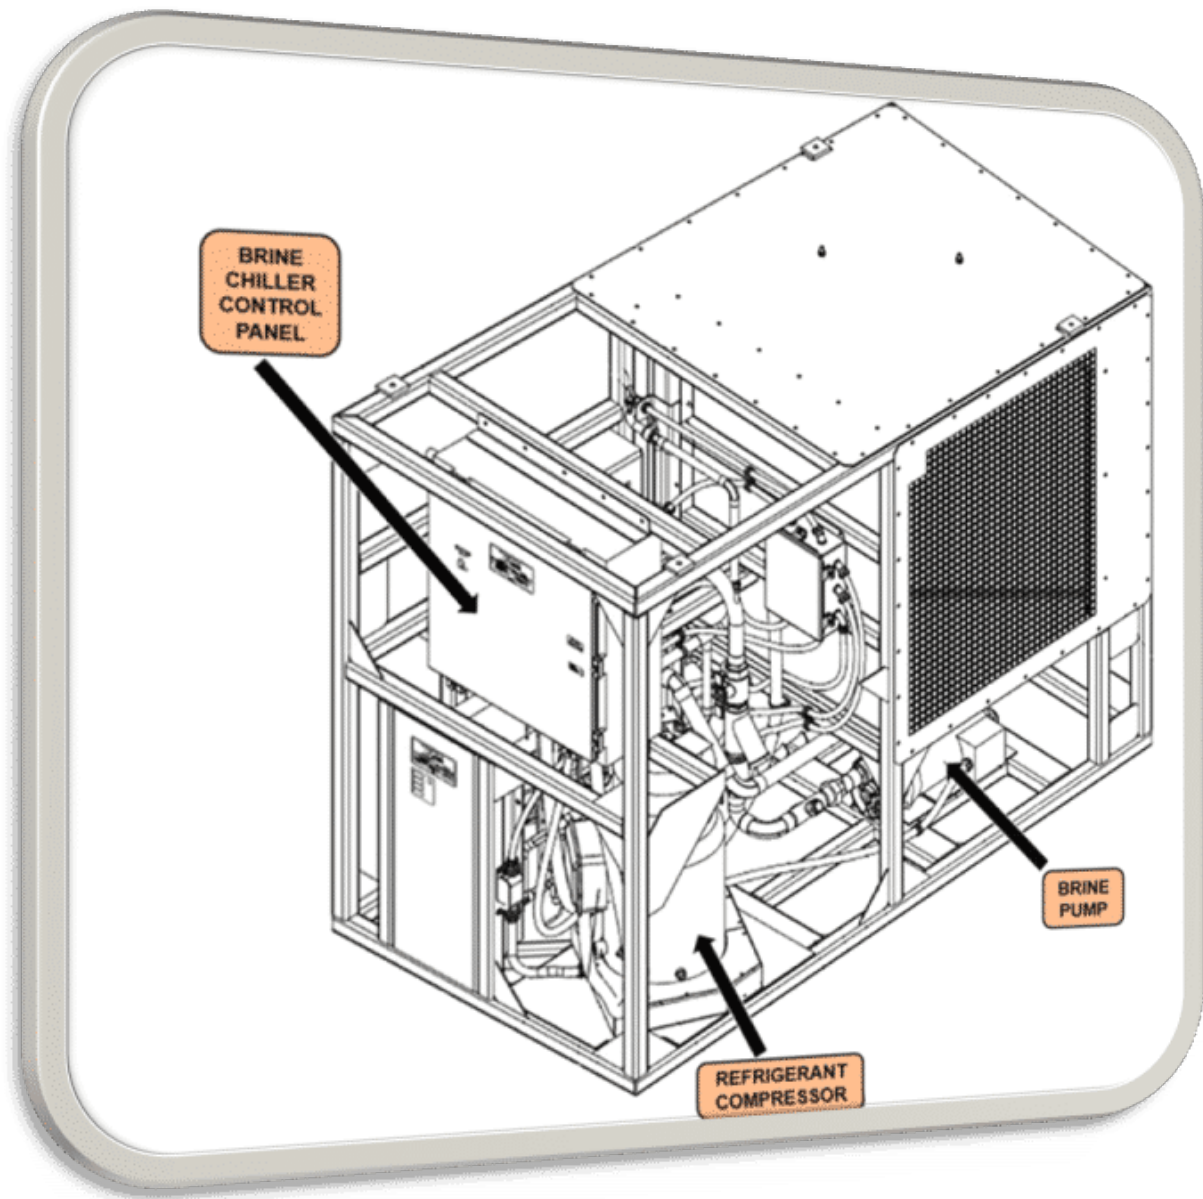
Missile Alert Facility Brine Chiller Unit CH-101.
